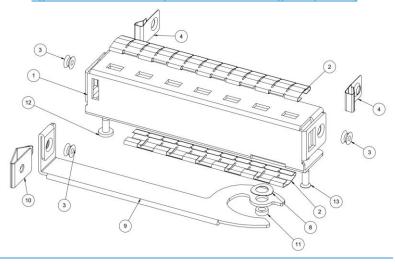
Small Card Generic I/O Bracket with a Latching Lever (2D View)
